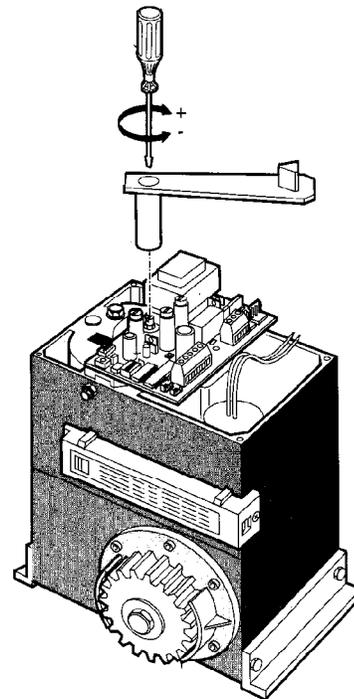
Adjust the clutch screw to change the torque of the 746 operator
